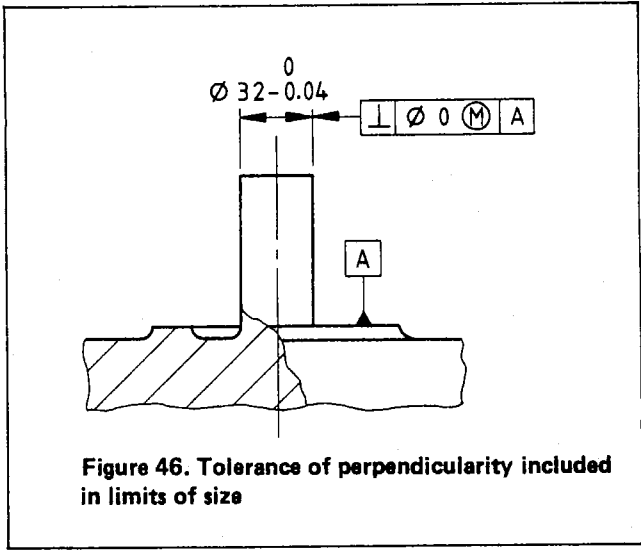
Tolerance of perpendicularity included in limits of size
